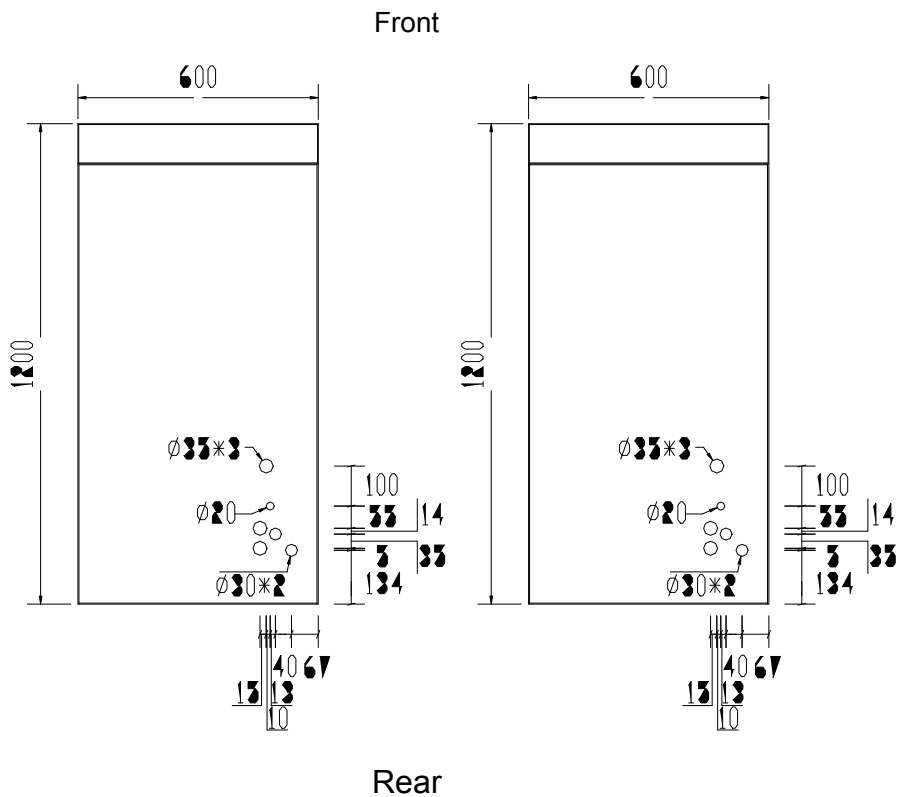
Dimensions of the Top Panel and Bottom Panel in 600mm side discharge unit (Left- Top Panel; Right- Bottom Panel)
